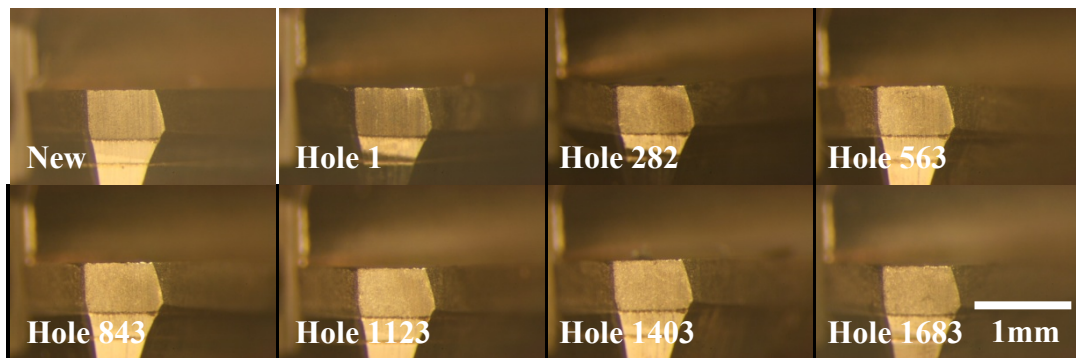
Tool wear micrographs of brazed PCD CTB002 reamer under 70bar through-hole cutting fluid, 32m/min cutting speed (Test 5)
